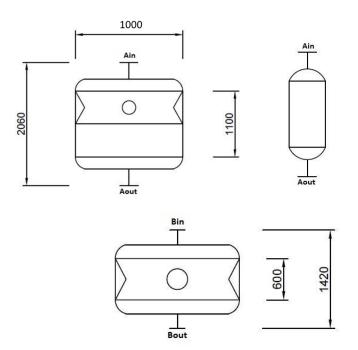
Dimensions of PCHE exchangers used for the intercooler. The same HE could be used for the post cooler as the specifications are similar.
